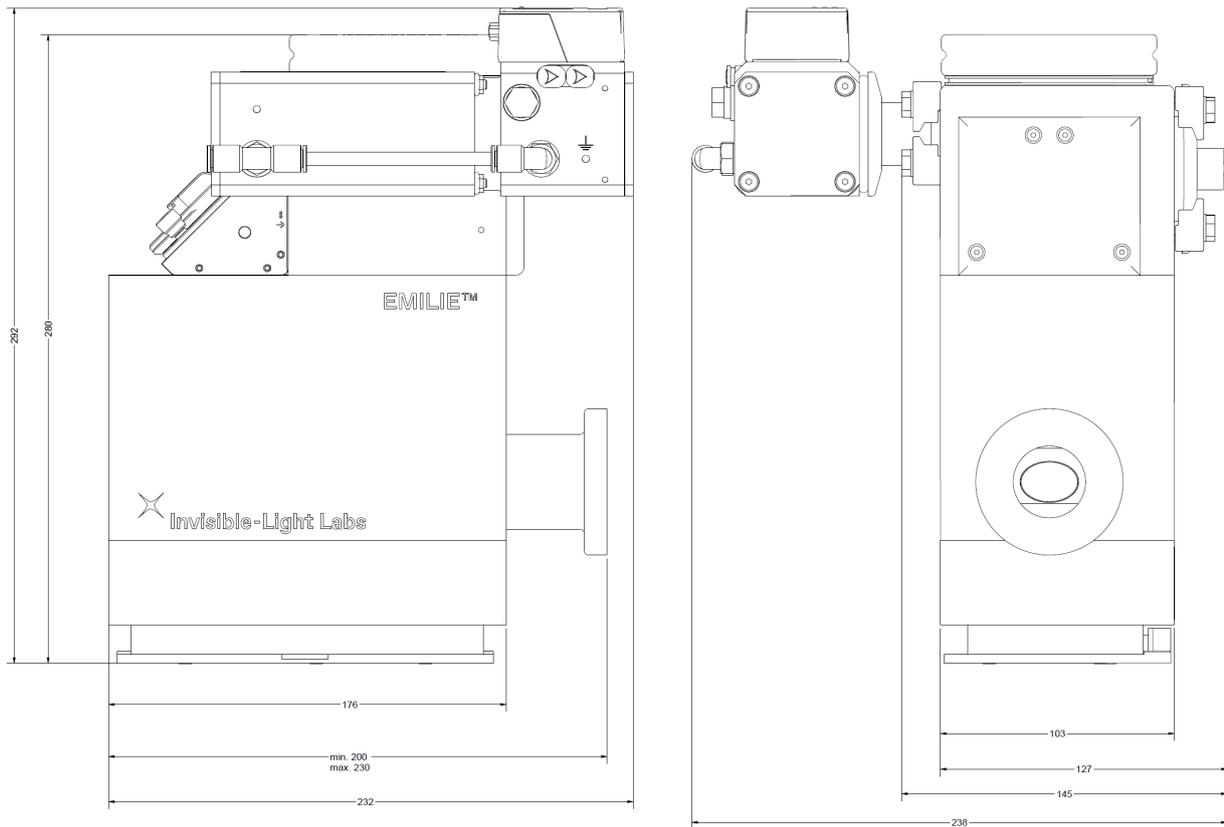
Dimensional drawing of EMILIE™, includes dimensions for use with and without HiPace® 10 Neo
